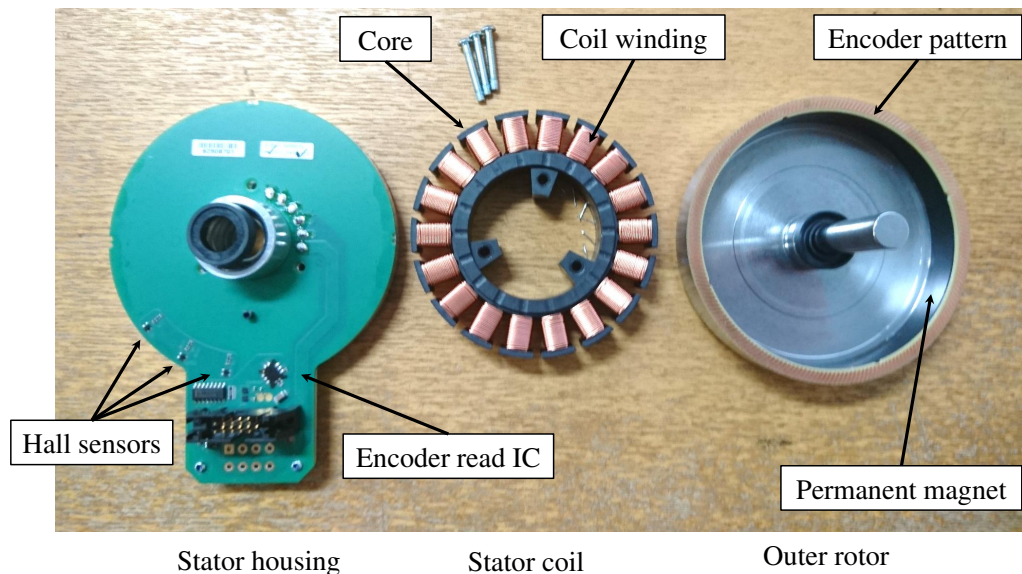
Disassembled brushless flat motor components (EC 90 flat 90W)
